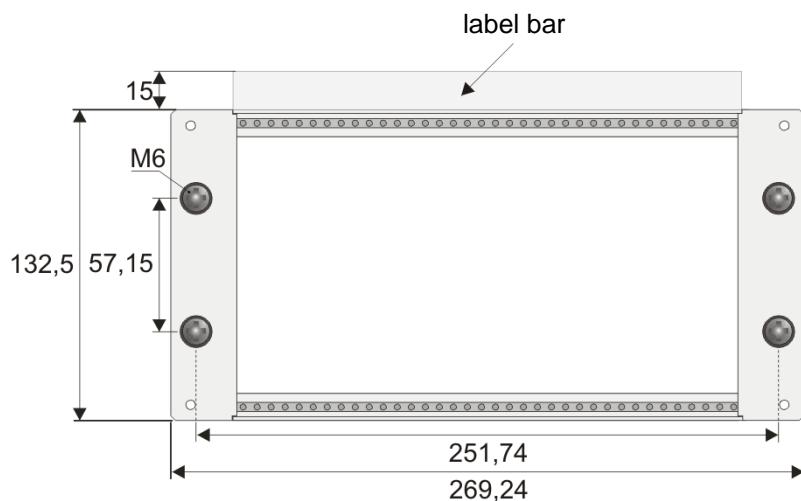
Front view of the board rack BGT08 with label bar, measurements in mm
